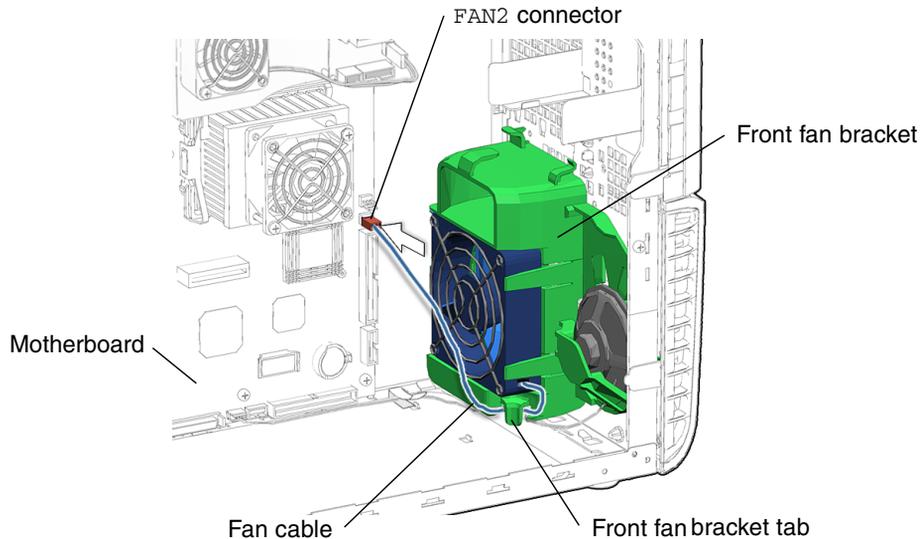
Routing and Connecting the Front Fan Cable
